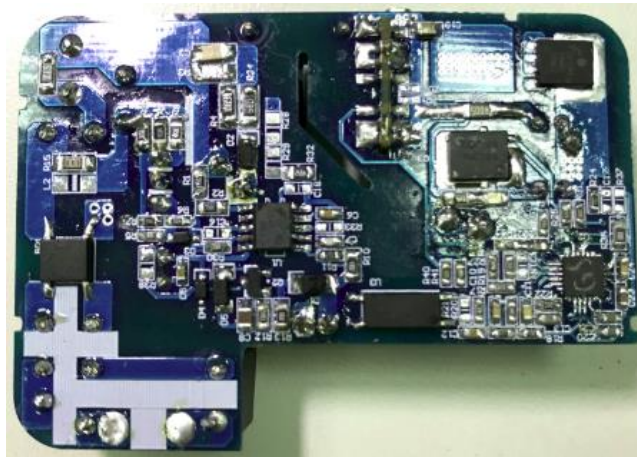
Photograph ( W x L : 63mm x 44.4mm) Bottom View
